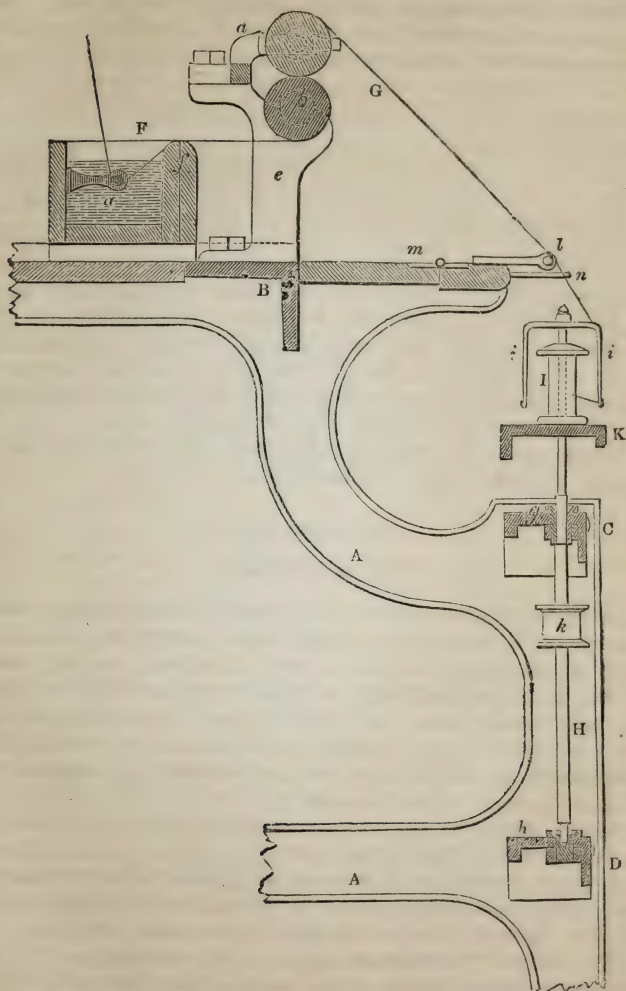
Doubling and Twisting Frame. Details of Spindle Mechanism.
